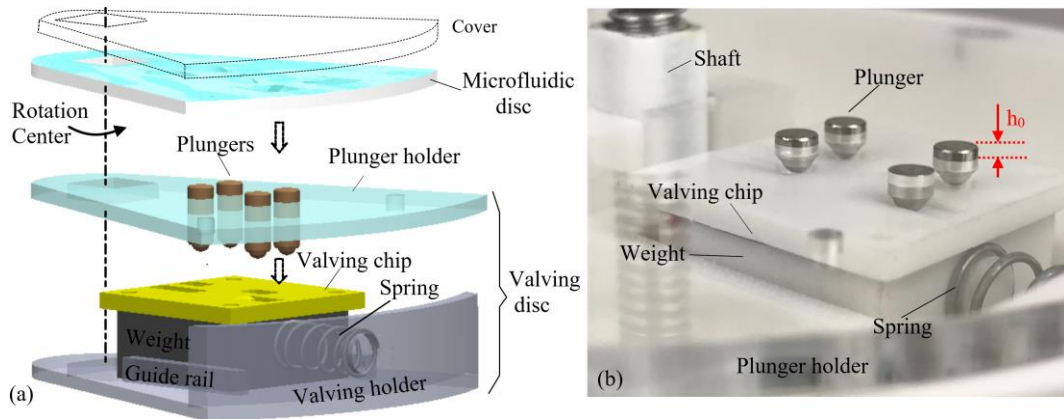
(a) The exploded view of the assembly of the system to show the components; (b) image of the assembled valving disc,  $h_0$  is the initial pin height above the plunger holder when microfluidic chip was not mounted
